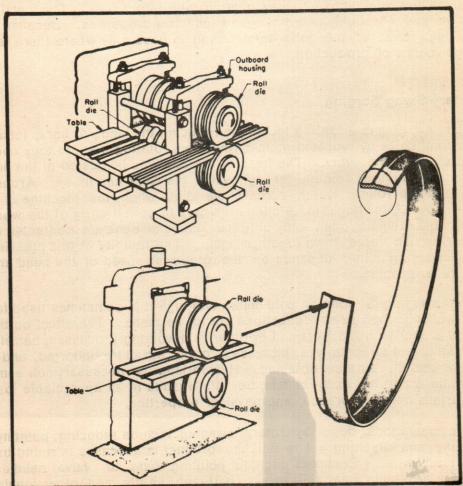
Roll Forging System, Die Assembly and Workpiece
